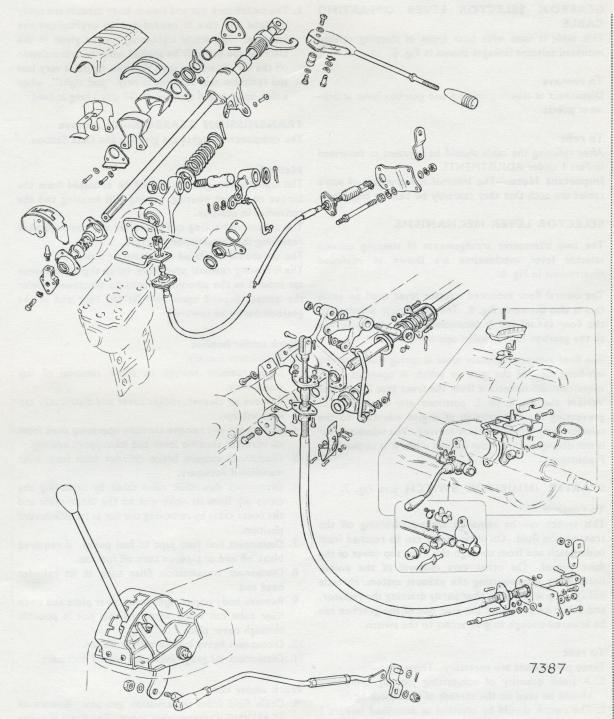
Details of alternative steering column selector lever mechanisms, and floor mounted selector lever mechanism
